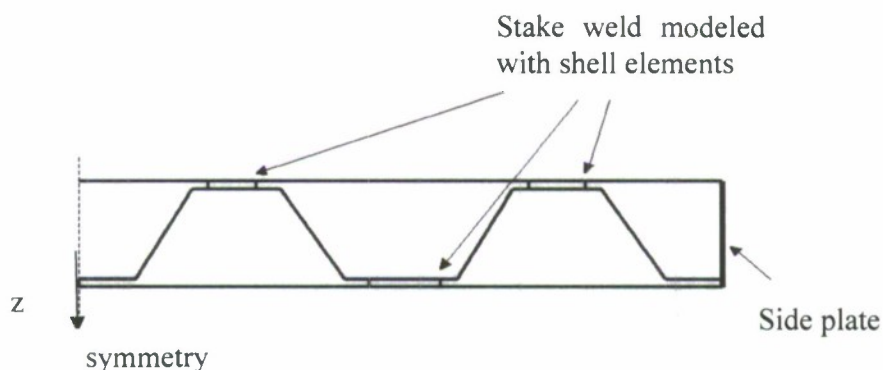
Stake Weld and Web-Core Configuration
